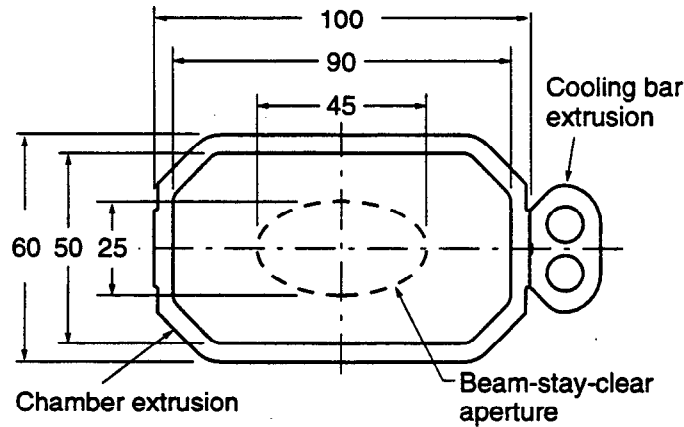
HER vacuum chamber cross section at a quadrupole ; dimensions are in millimeters.
